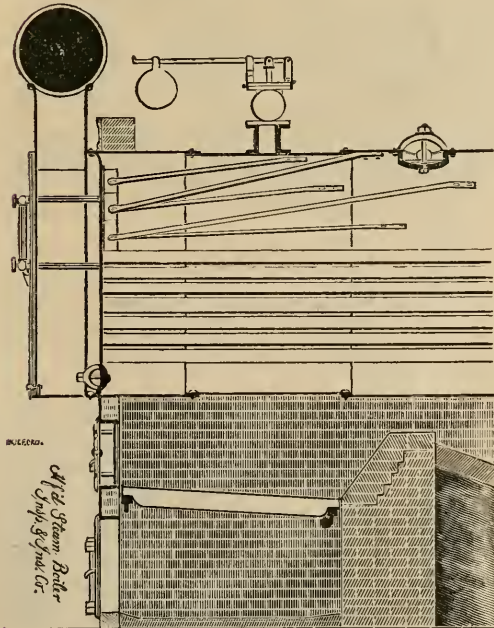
SECTIONAL VIEW OF OVERHANGING FRONT.
